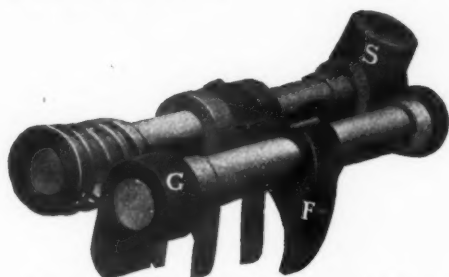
Neutralizing mechanism unit of the Vulcan electric gearshift
